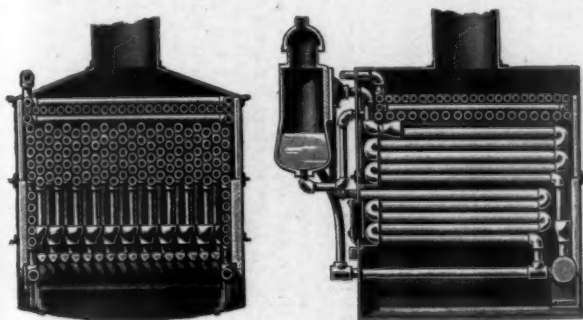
HERRESHOFF'S BOILER, 1890.
